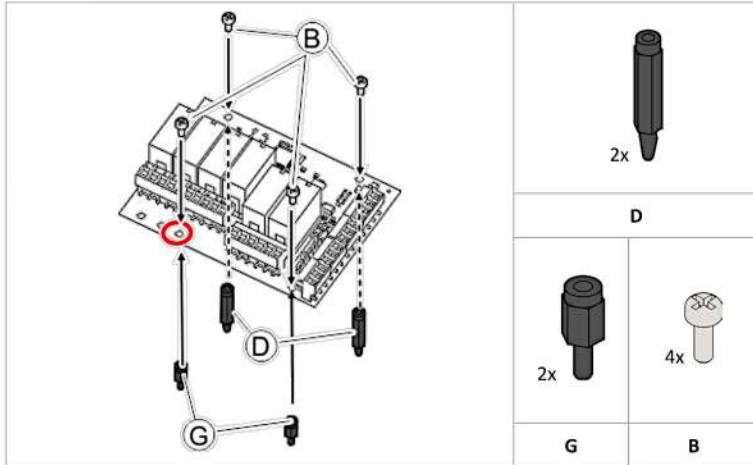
Assembly using the example of the TST RFUxIO-E
